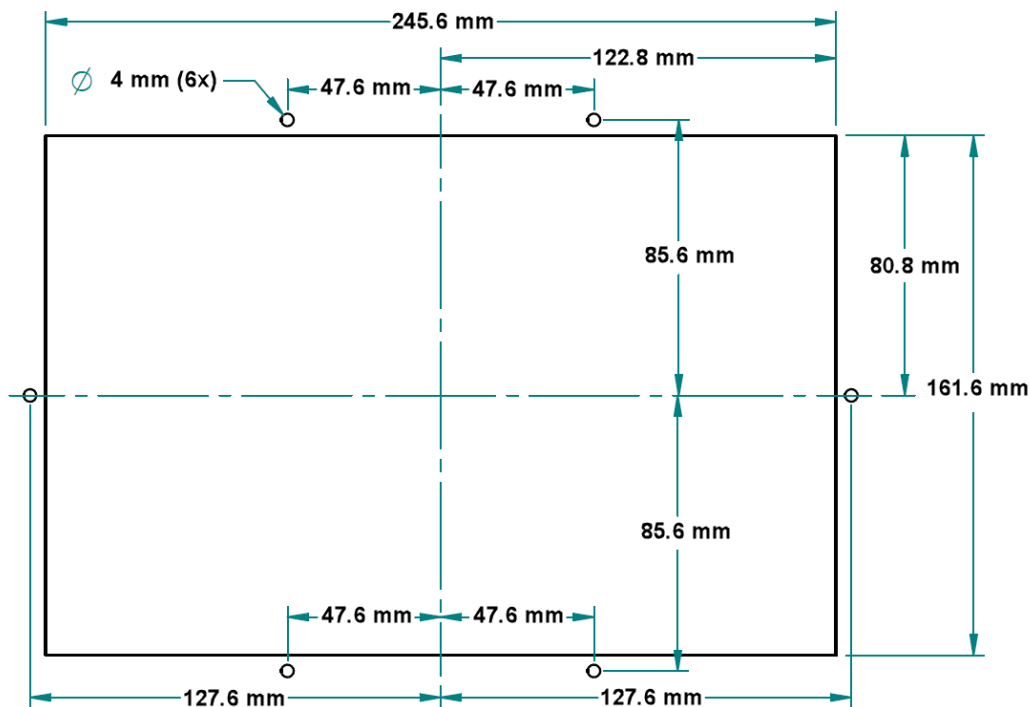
Dimensions [mm] of the OpHMI cut-out for wheelhouse console
